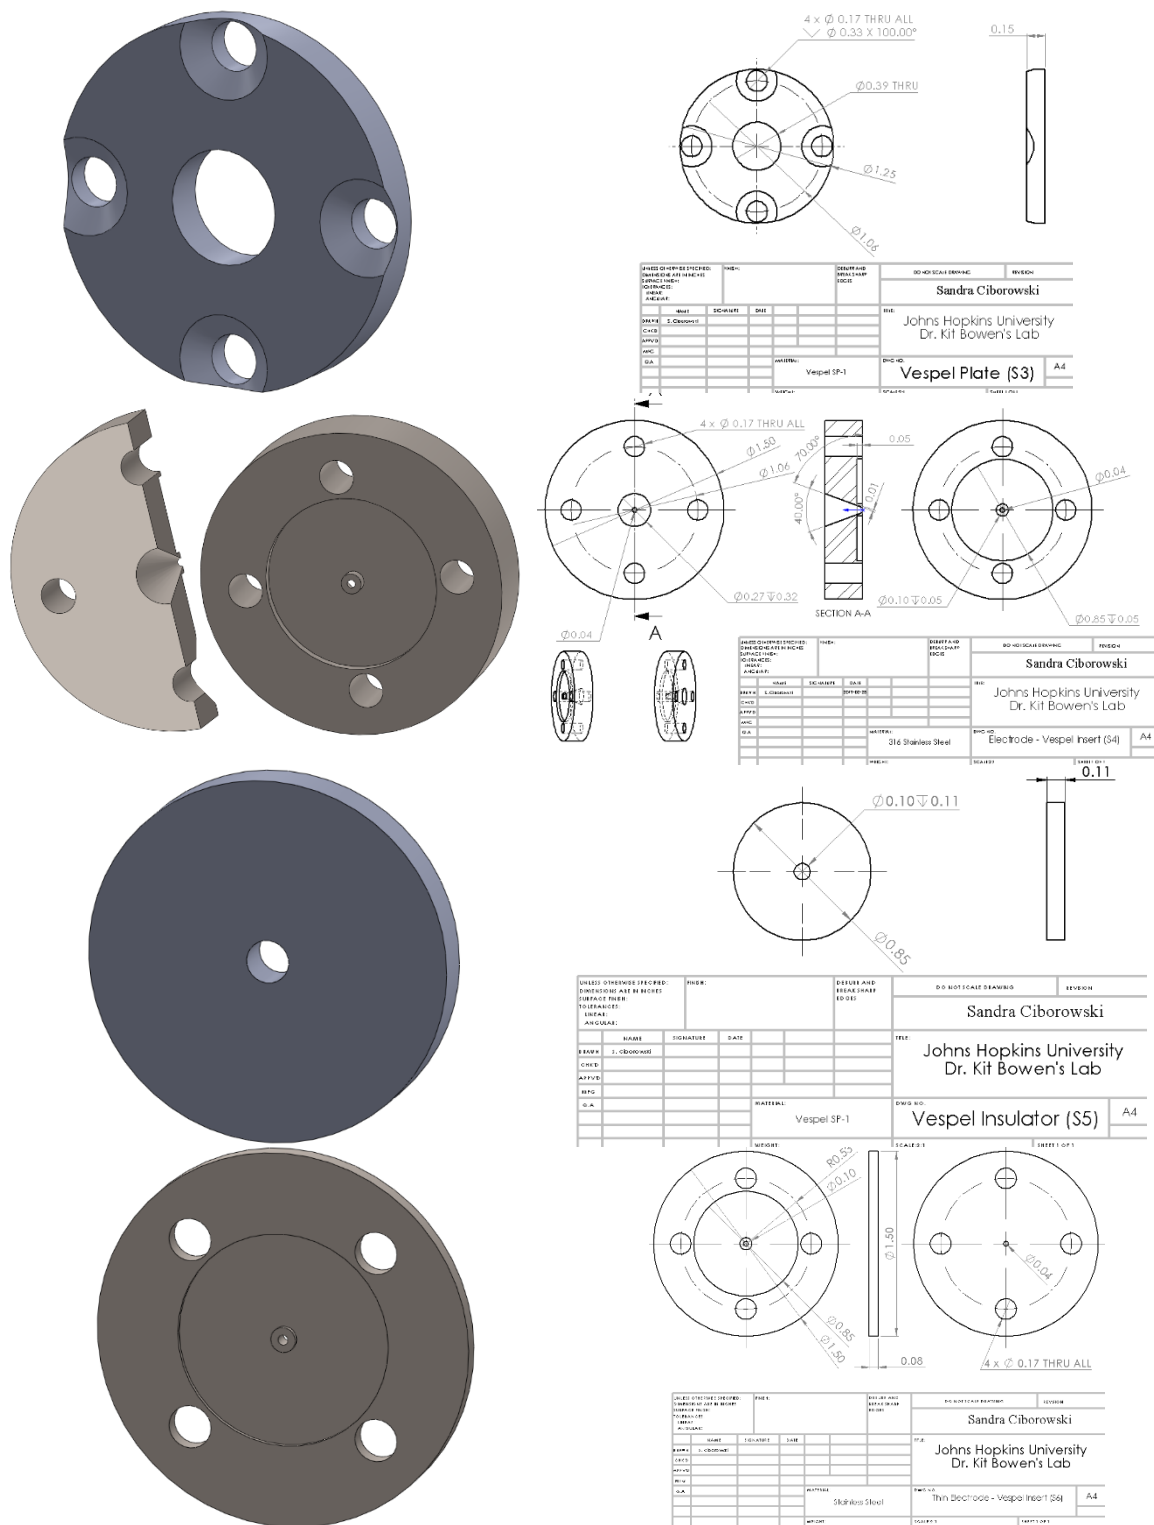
Modified Lineberger Source Parts with Vespel Instead of Macor.
